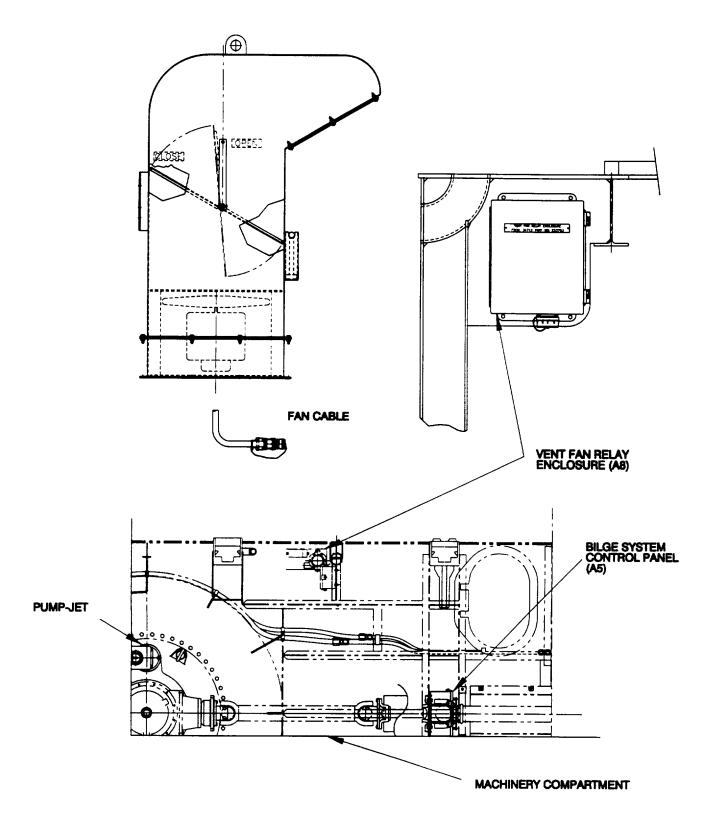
Propulsion Module/Powered Section Assembly (Exhaust Plenum - View F). (Sheet 8 of 11)
